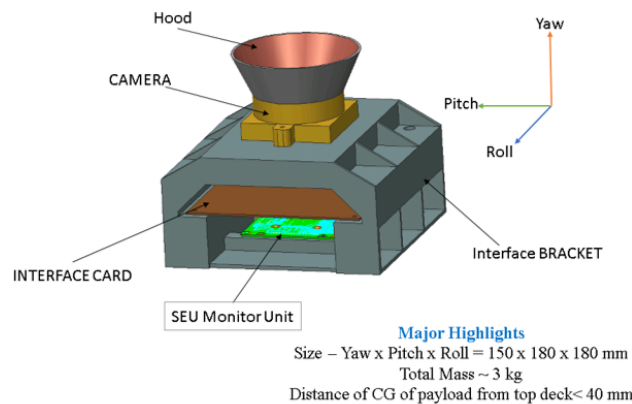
ISOMETRIC VIEW OF SBR AND SEUM PAYLOADS
